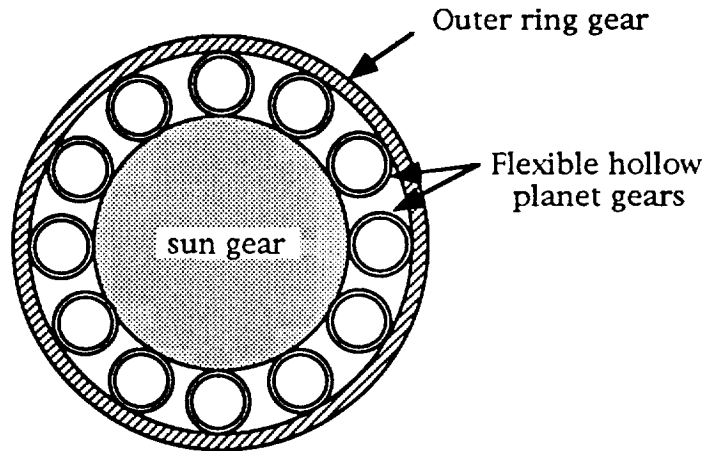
Flex-gear Device (gear teeth are not shown)
